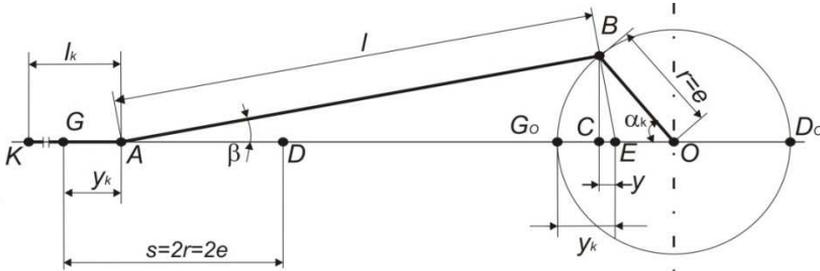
Scheme of crankshaft assembly used in device to oscillatory burnishing
